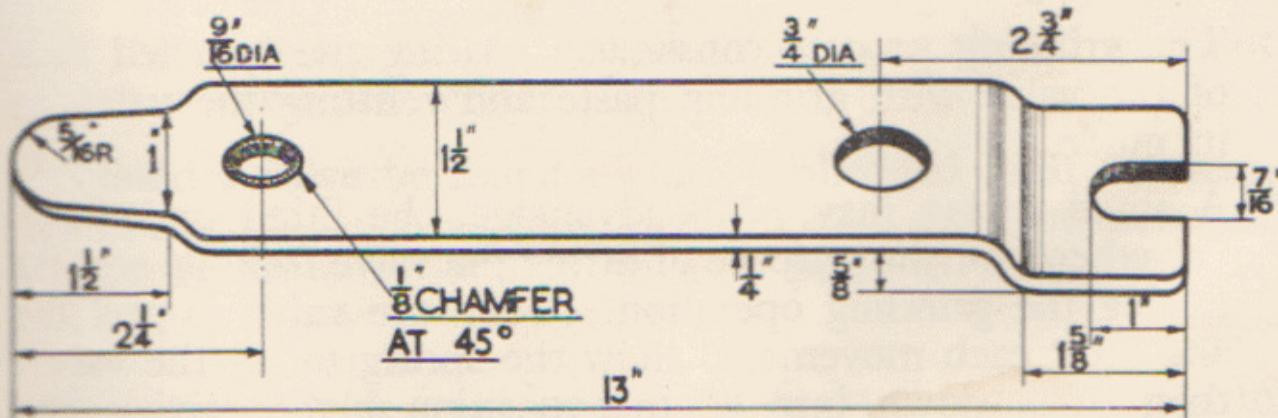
Valve spring compressor and lever for cylinder head removal.
